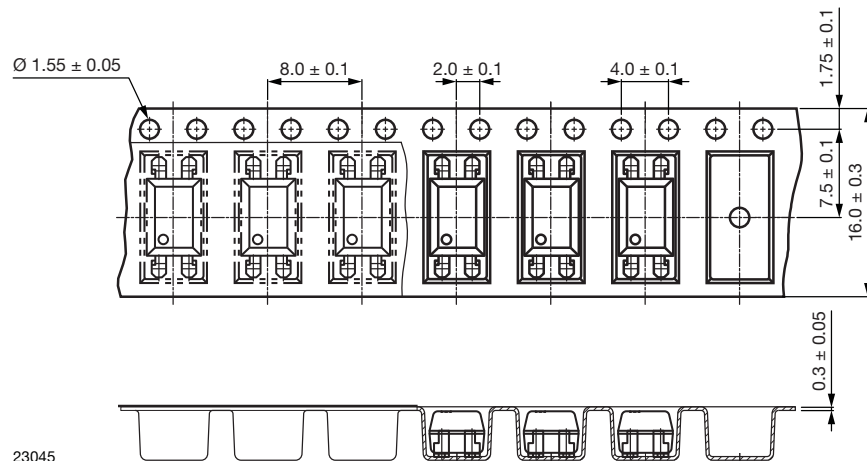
Tape and Reel Packaging (2000 pieces on reel)
